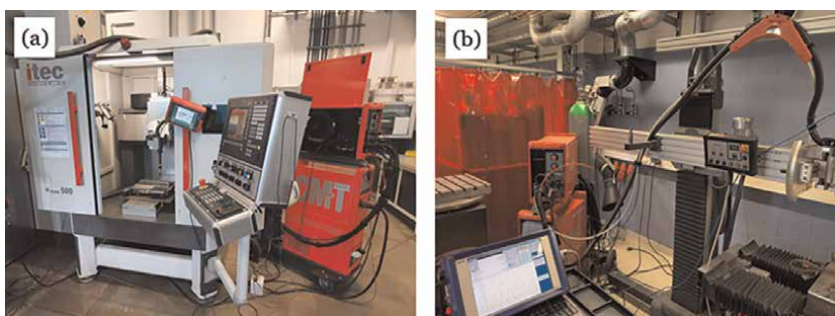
Experimental setup for additively GMAW (a) three-axis gantry machine with CMT advanced 4000 and (b) two-axis welding portal with CMT TPS 4000.
